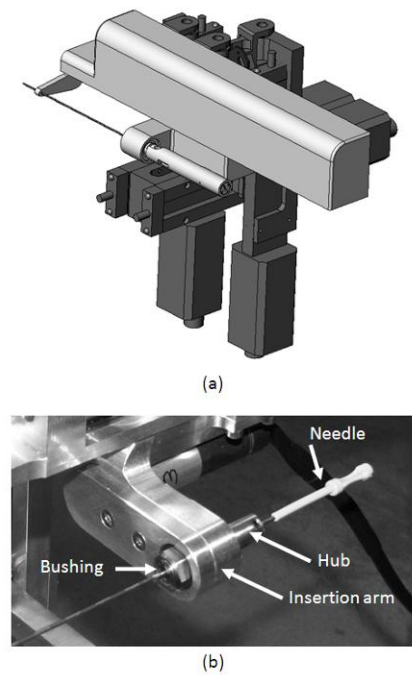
(a) CAD model showing how the needle insertion module can be covered by a sterile plastic cap. All white parts are sterile, while all black parts are covered by a sterile drape. (b) Detail of the needle insertion arm, showing the location of the sterile bushing that separates the sterile needle from the non-sterile rotation hub.
